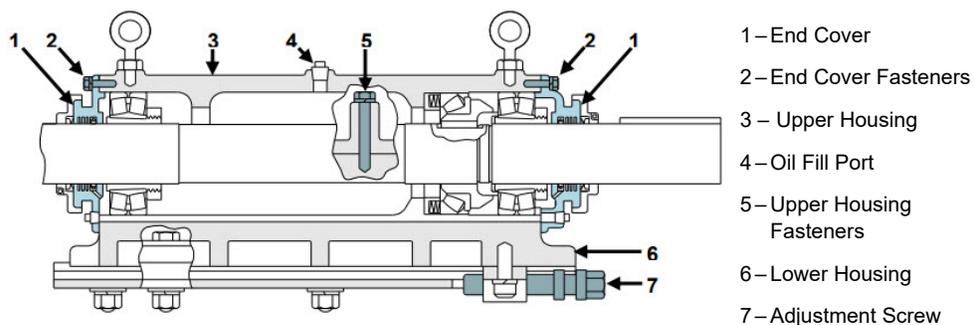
Closing the Housing: LEF Bearing Assembly
